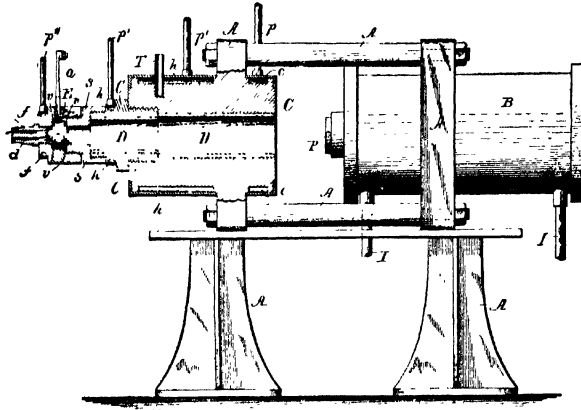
The Gillmore Stuffing Machine for Manufacturing Pyroxylin Rods and Tubes.
